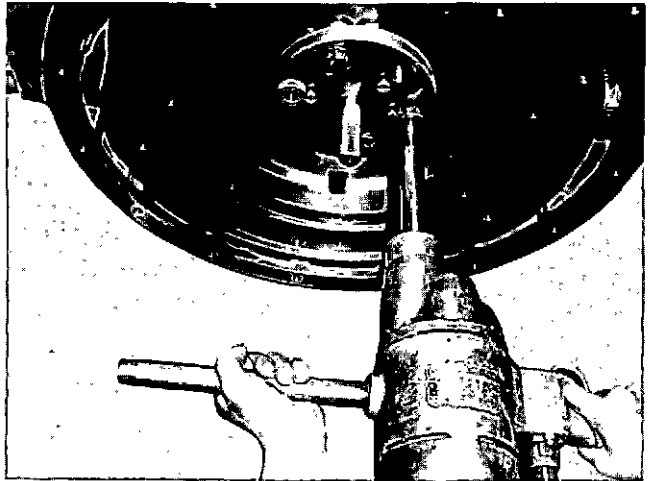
, V414179. Reaming flywheel and crankshaft dowel holes
